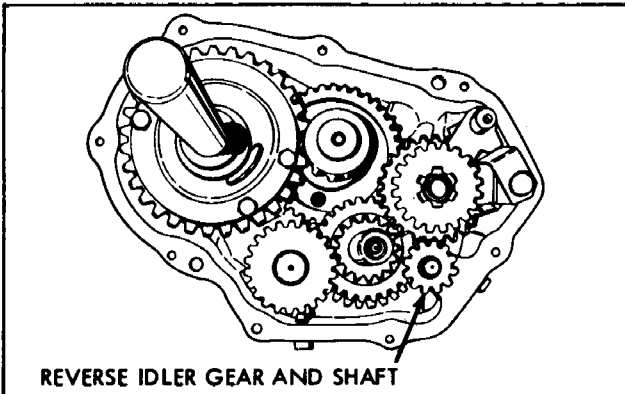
Reverse Idler Gear, Shaft and Spacer
